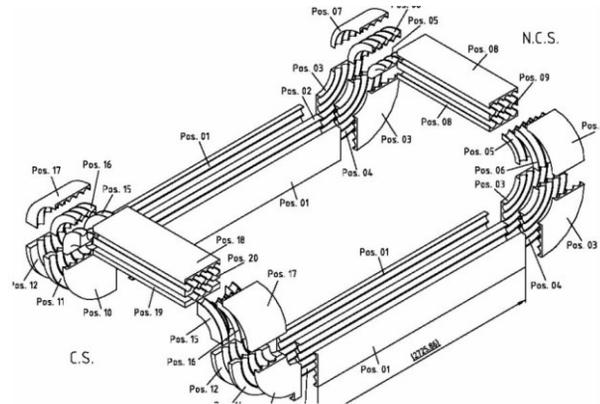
Exploded view of the complete set of structural elements for the upper SIS 100 dipole coil (not in scale). The coil structure (2 layers, 4 turns each) is clearly reproduced by the G11 pieces such that the cable is firmly kept all over its length.
